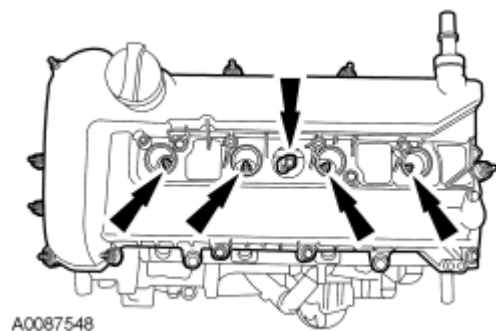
Locating Cylinder Head Temperature Sensor And Spark Plugs
